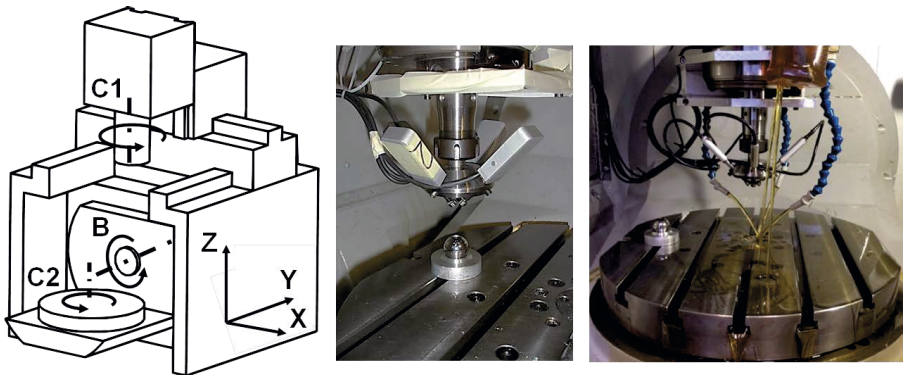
a) Schematically representation of the kinematic milling machine under investigation [13]; b) R-Test measuring device used on the machine tool [8]; c) cutting fluid supply on the machine tool under investigation during the measurements
